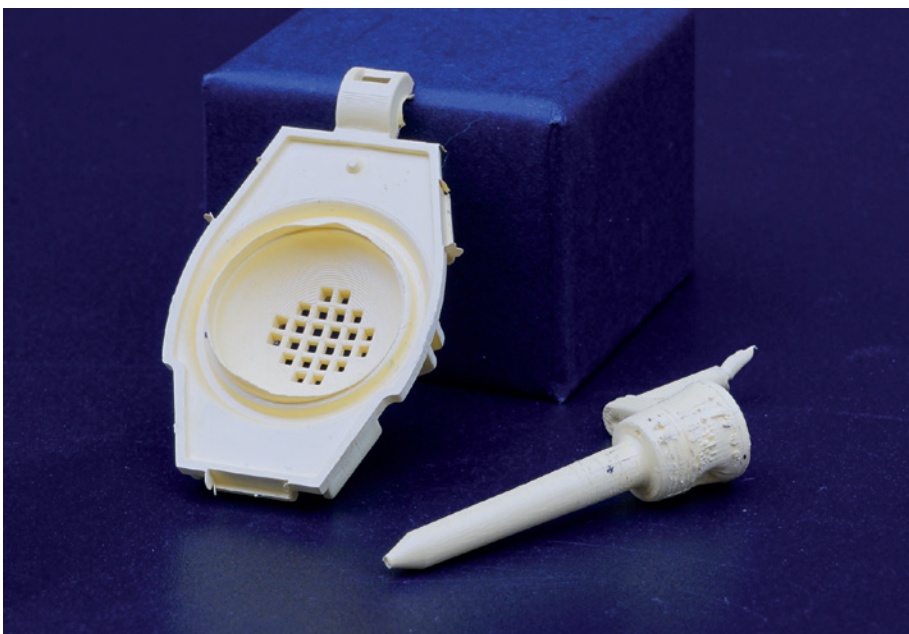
Prototype parts and cold runner sprue, moulded in first test run with high-temperature resin mould (some flashes and details to be optimised in subsequent loops).
